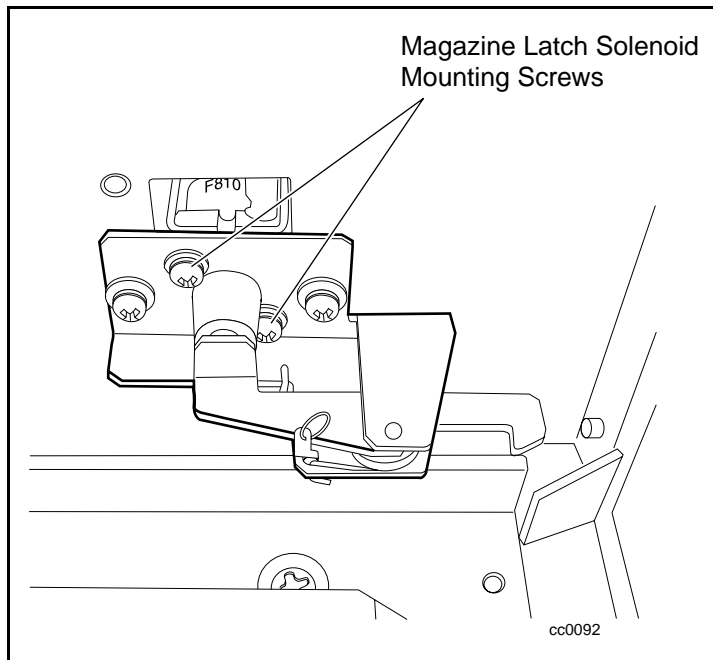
Magazine latch solenoid mounting bracket screw locations
